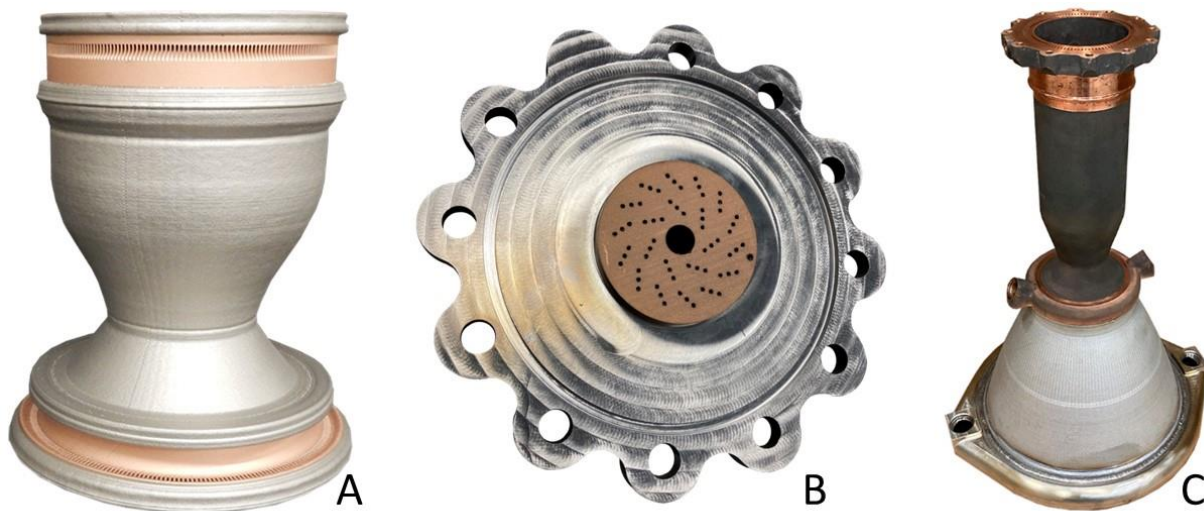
Examples of Component Configurations using GRCo-Superalloy Bimetallic AM Interfaces. A) Combustion chamber with radial bimetallic deposition using LP-DED, B) Injector using axial bimetallic using L-PBF, C) Coupled chamber and nozzle with axial bimetallic using LP-DED.
